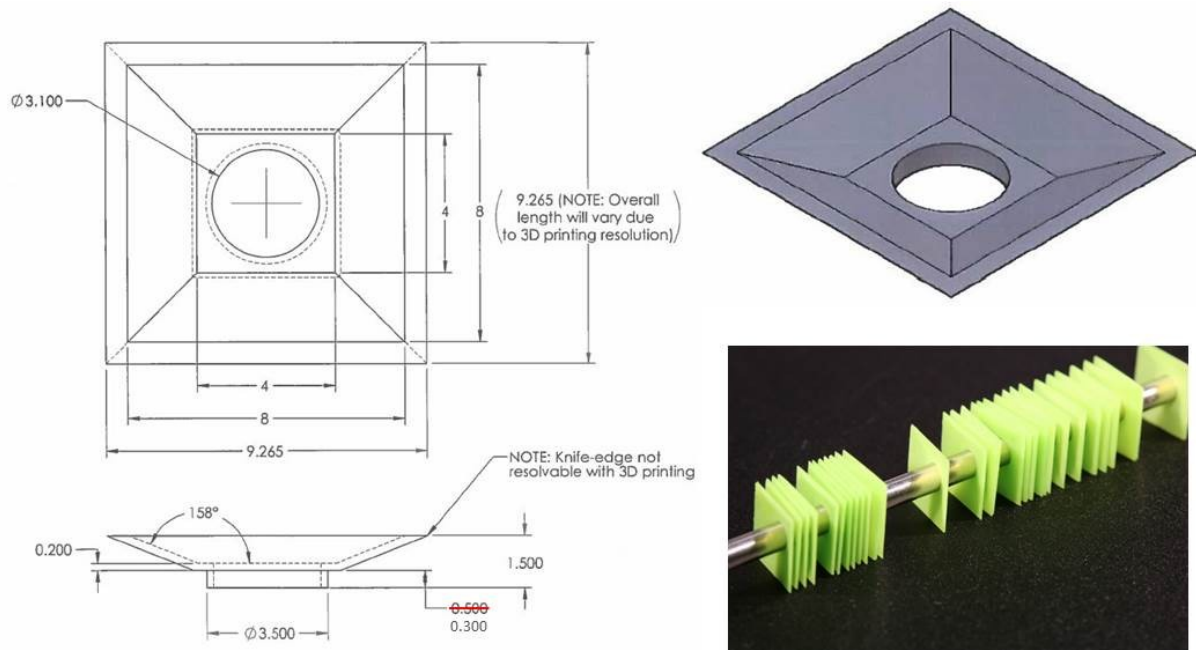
3rd generation cone shields featured a 3.1mm OD LEH and 0.3mm tall light-tight collar to accept the 3.0mm OD physics packages; a shield LEH fit check was performed at GA using a 3.0mm gauge pin.
